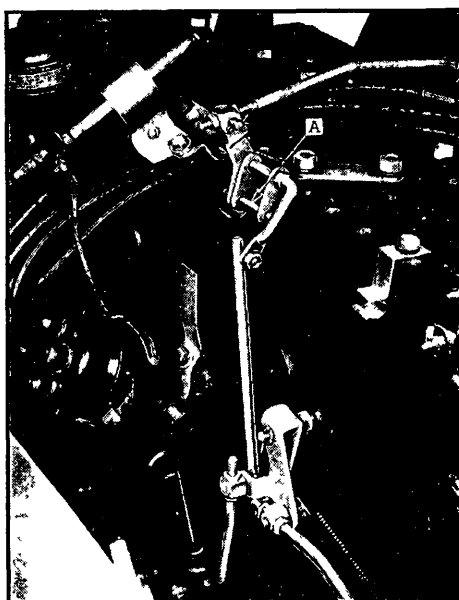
A Adjusting pin installed at "A." 1950-52 Six Hydramatic
